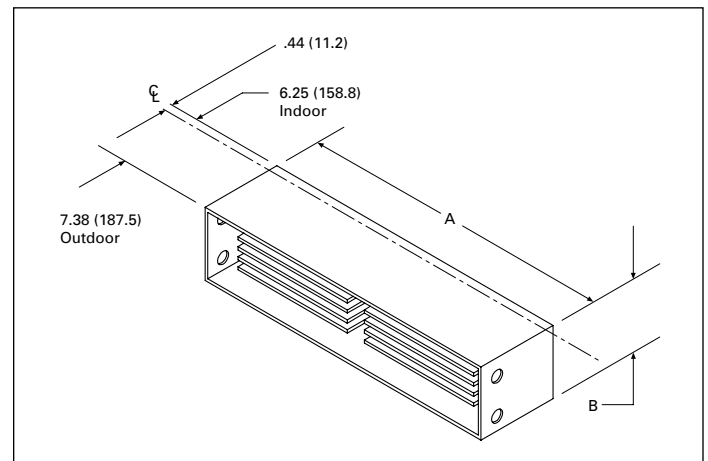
End Closer with Pow-R-Bridge Removed
